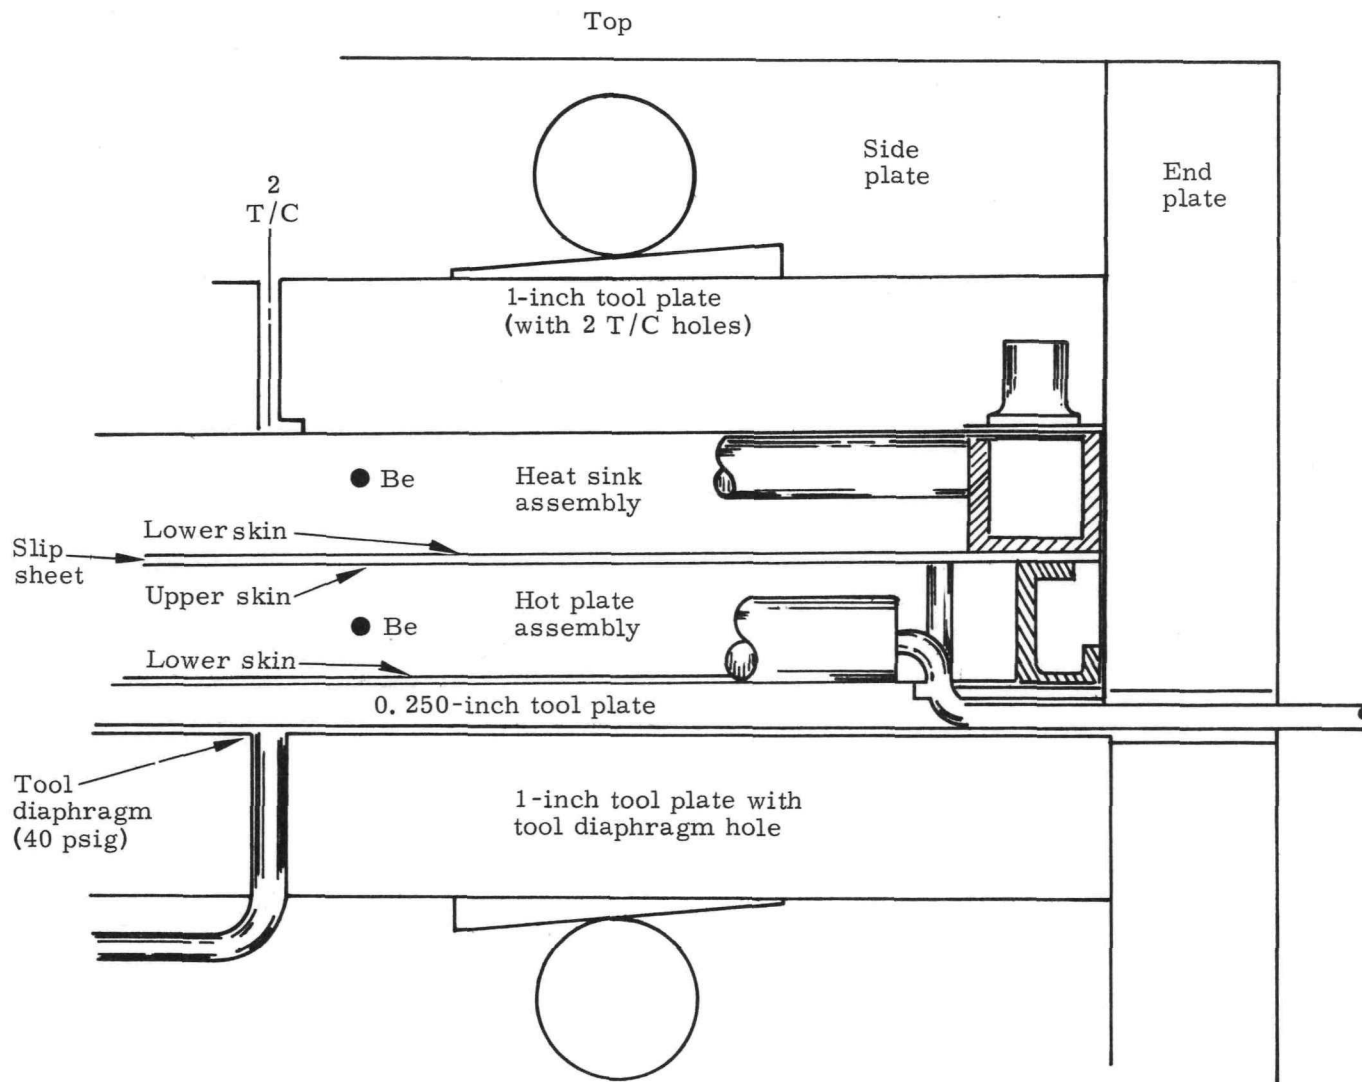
T/E MODULE Be/HAYNES-25 PLATE BRAZING FIXTURE
